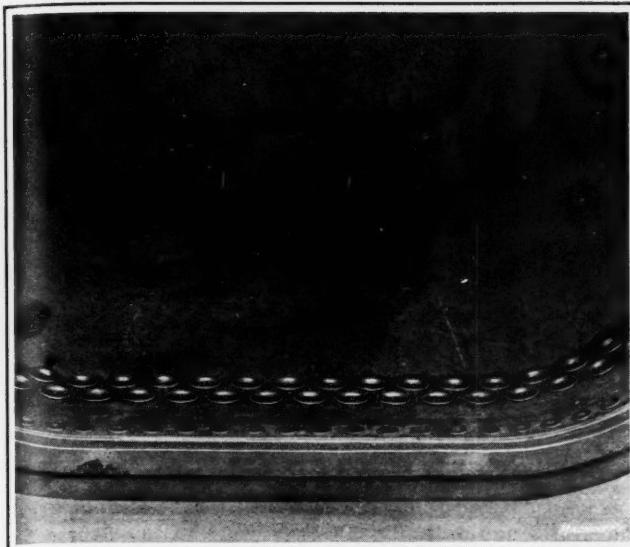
Tubular Transformer Tank, showing Tubes expanded preparatory to Welding
